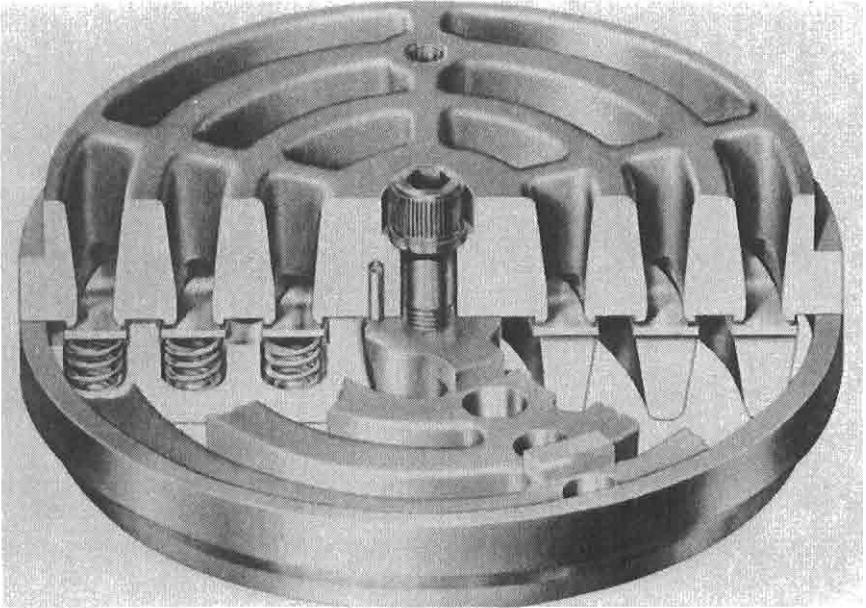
An exploded view of a cushioned channel valve. (Courtesy of Dresser-Rand)
